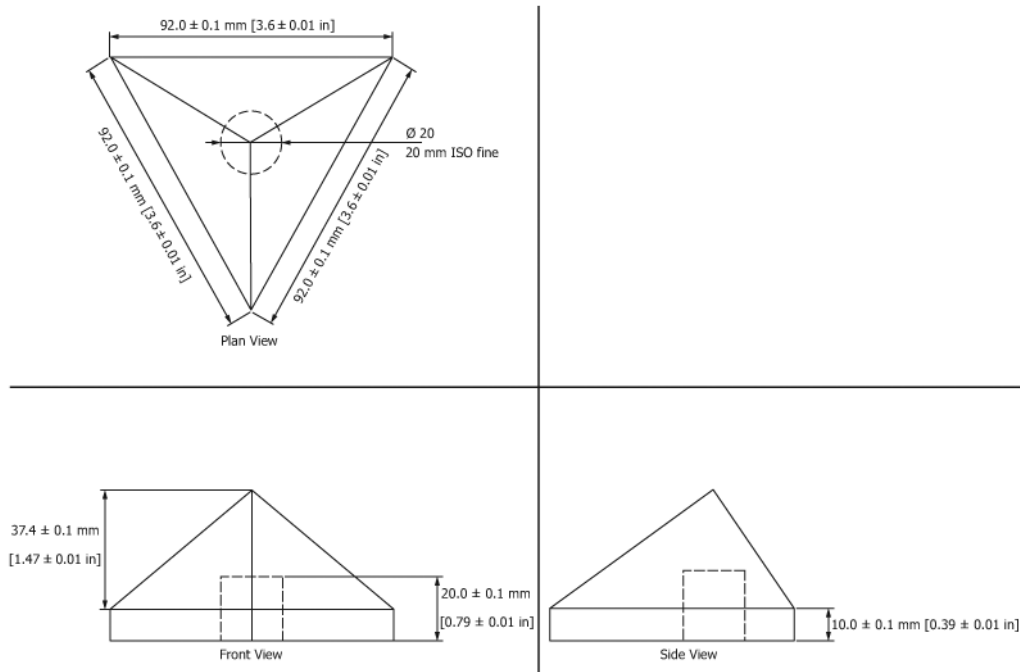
Brick Corner Anvil (Details taken from PSDB 21/04)
